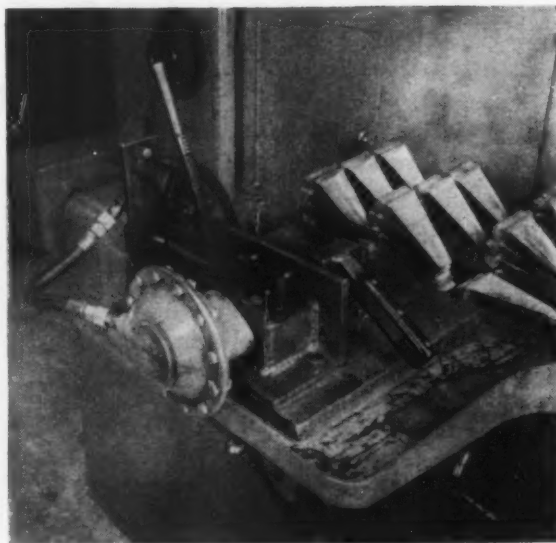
The work loading station of the grinder. This air cylinder arrangement opens shuttles for unloading and reloading. Three shuttles per machine are used.
